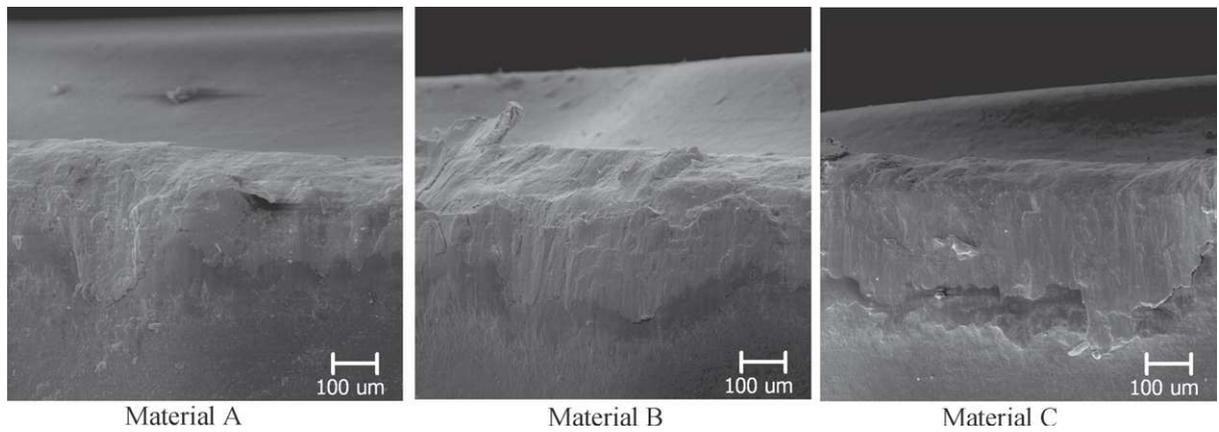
Tool flank wear at cutting speed of 1000 m/min.
